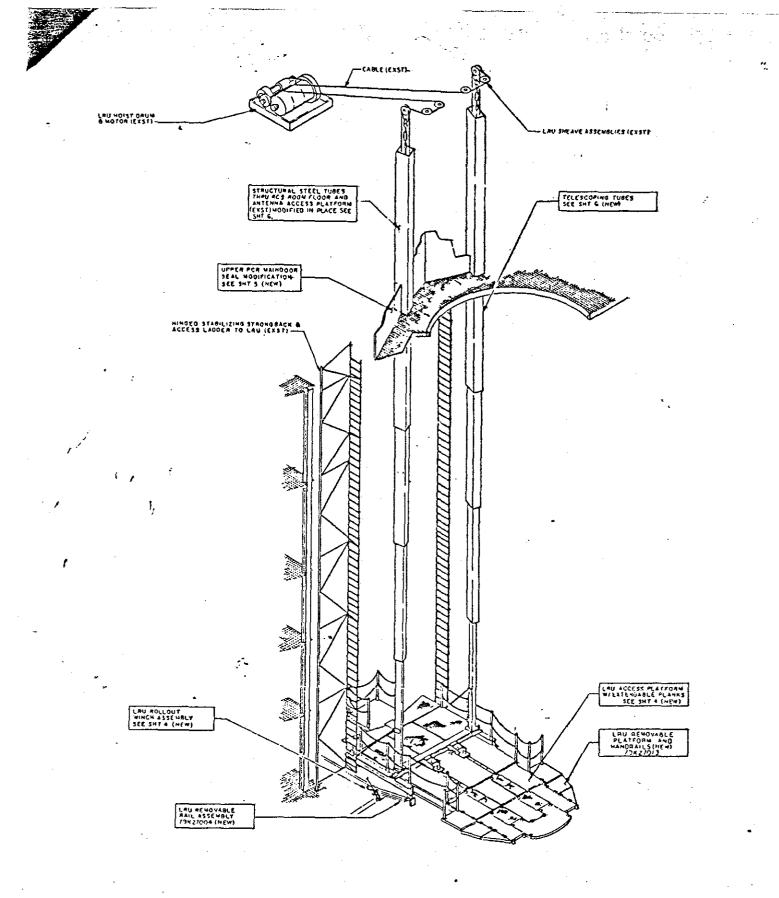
B-1. SKETCH OF LRU ACCESS PLATFORM AND TUBE ASSEMBLY ISOMETRIC
